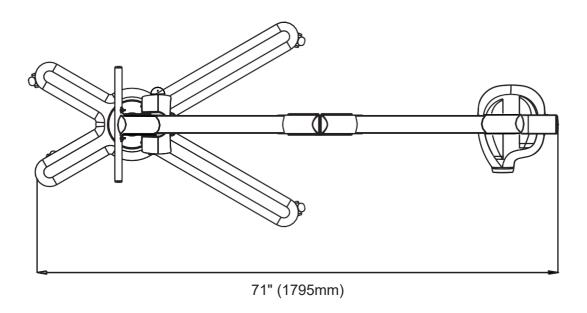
Floor Mount ImageScan HD Fully Extended Dimensions
